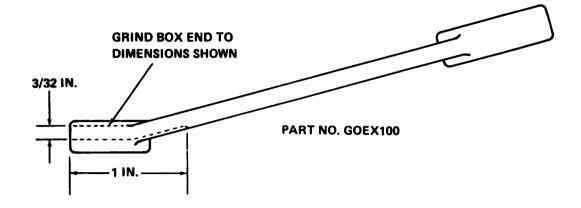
Modification of Short-Handle Flank-Drive 5/16-inch Combination Wrench
